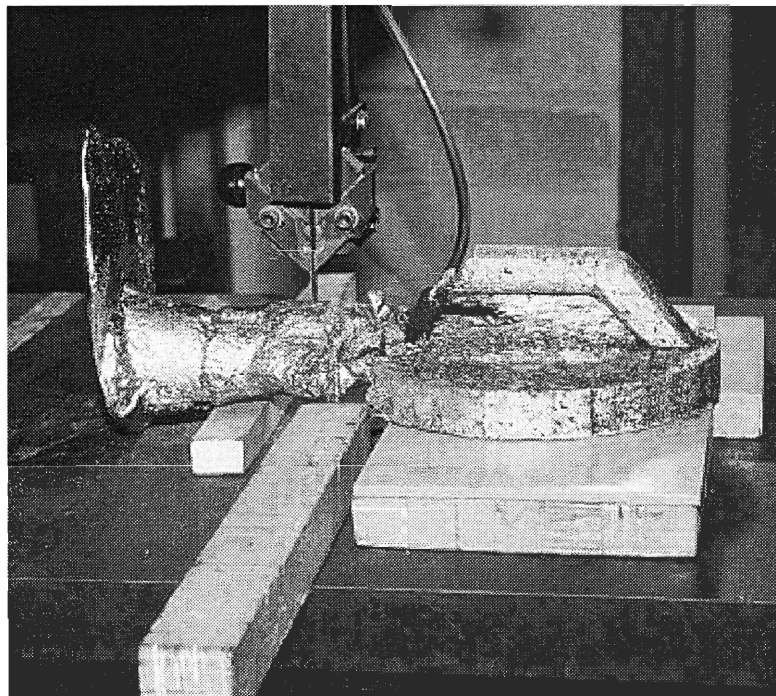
Oddly shaped casting being degated with support and push blocks.
